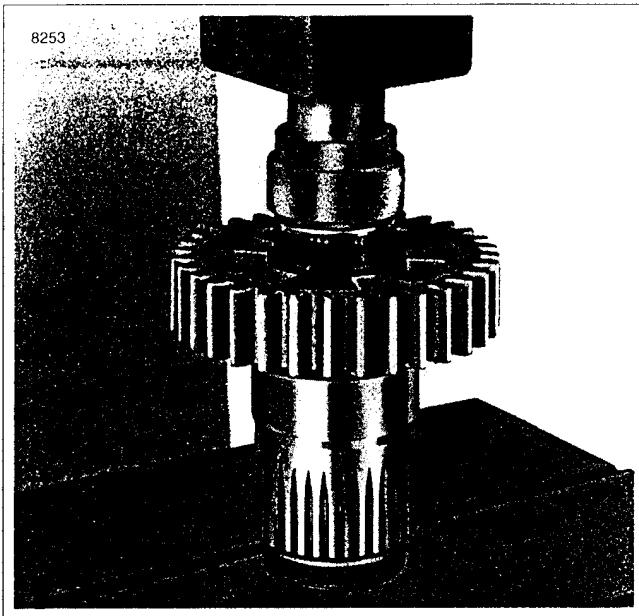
Installing Transmission Side Needle Bearing in Main Driver Gear
